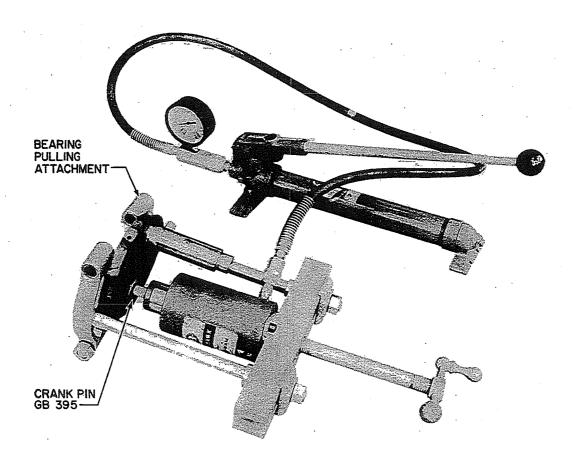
2 to 1 Shaft, Installation of Crank Pin GB395
